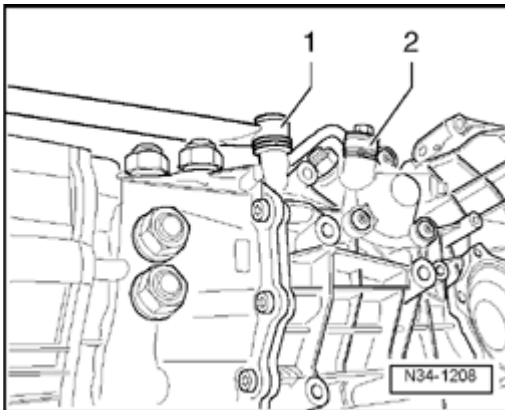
Identifying Push Rod And Connecting Rod For Selector Rod
